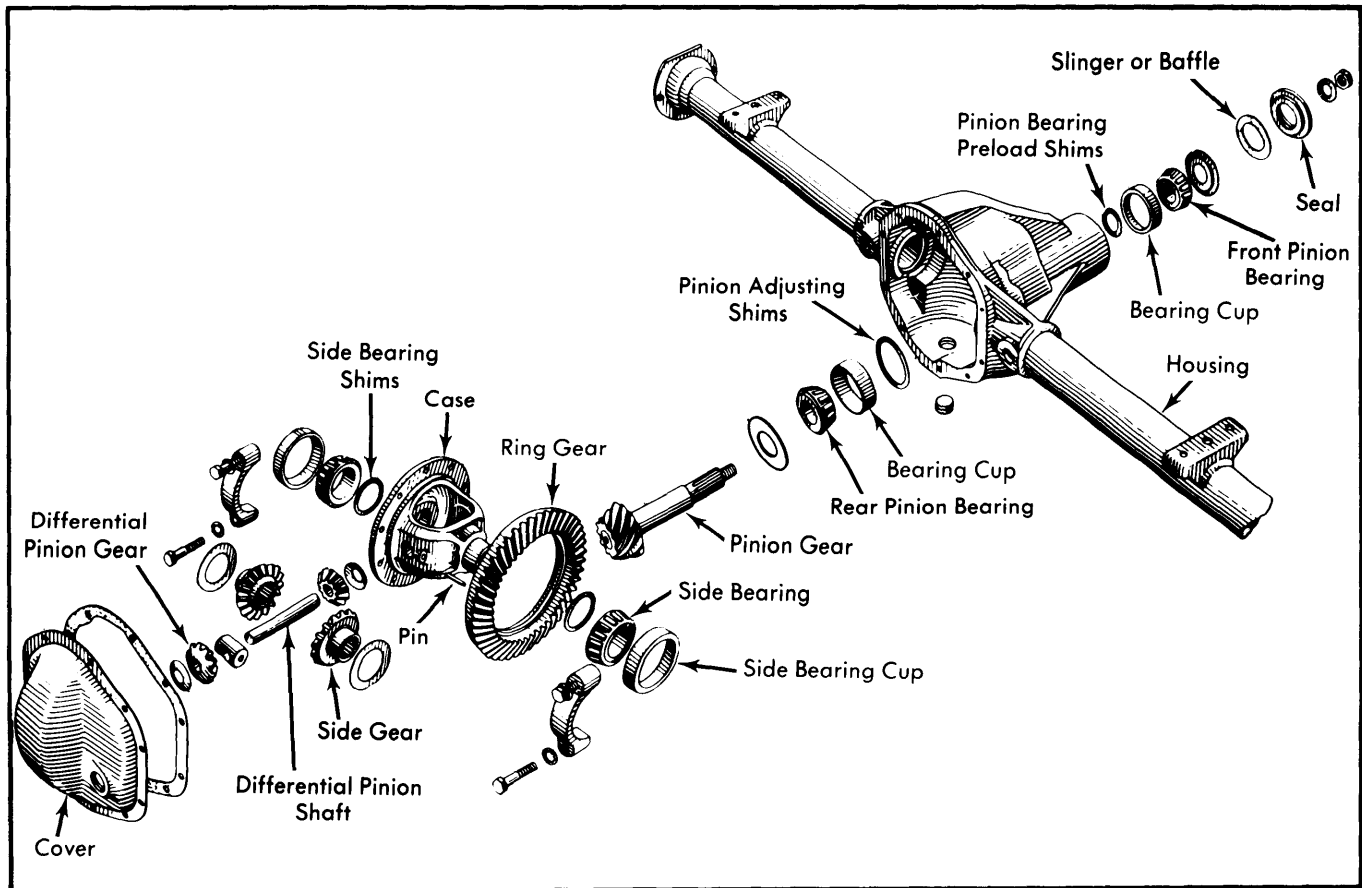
Exploded View of Dana/Spicer Full Floating Assembly (One-Piece Differential Shown)
